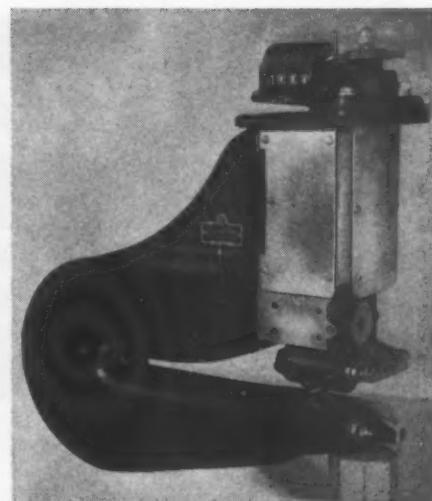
P&W Electrolimit Deep-throat Continuous Gage for Rolled Strip Material
